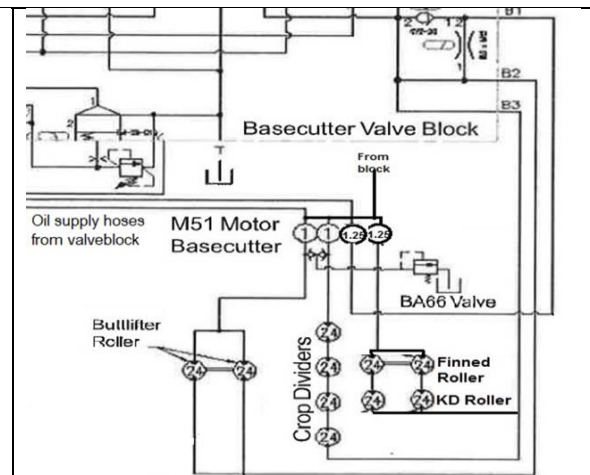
Modified basecutter motor configuration, with Finned & KD rollers on the basecutter circuit.
